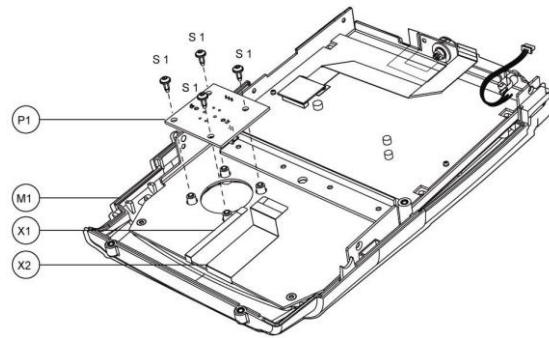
Remove Main Rotary Board from Subassy Case Front
